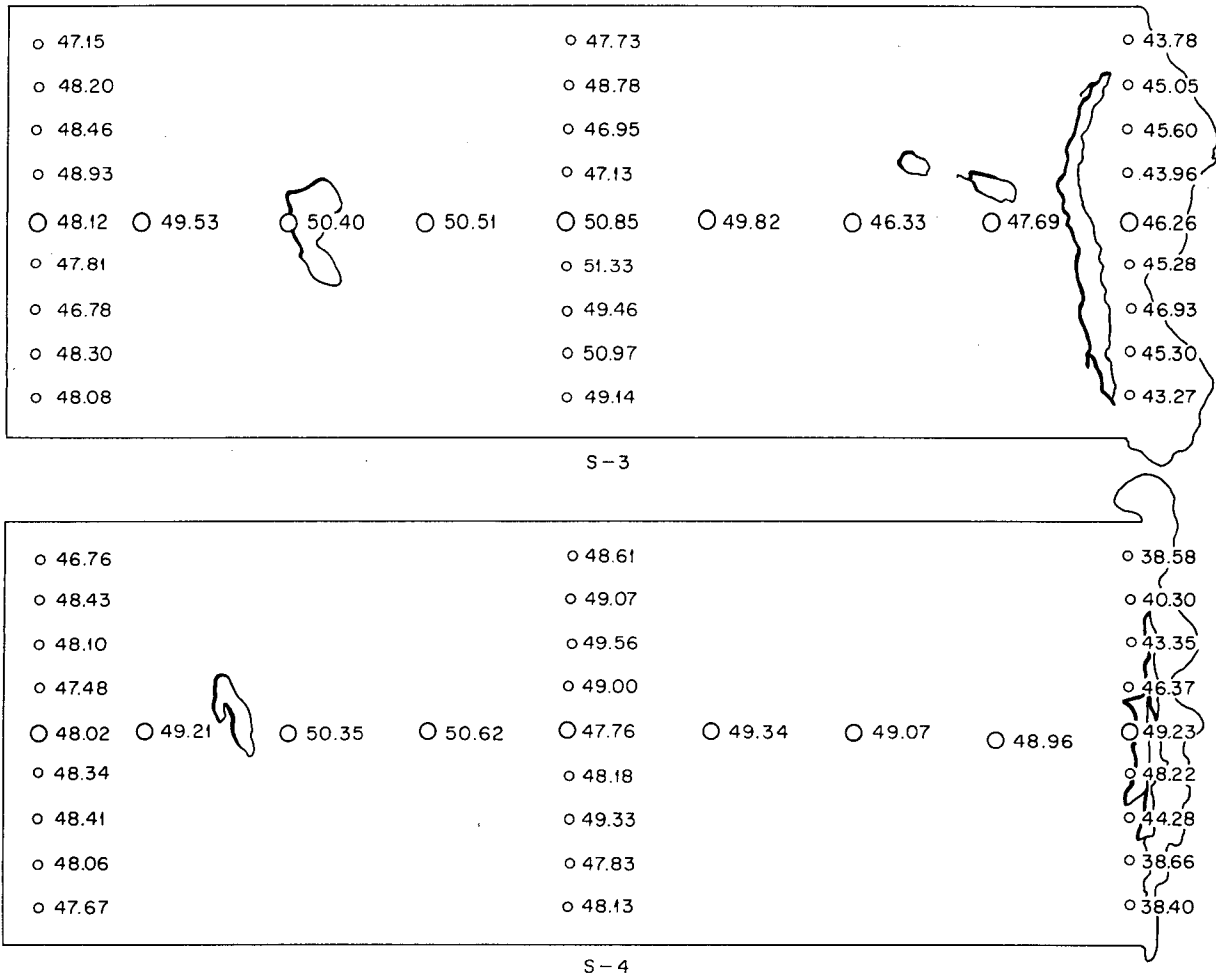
Drilling Pattern and Uranium Contents of Sectioned Cylinders S-3 and S-4, Produced in Molds Having Dimensions as Given in Table 72.
